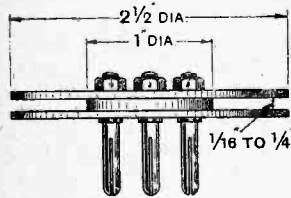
Dimensions of a convenient size of former for H.F. transformer windings.
